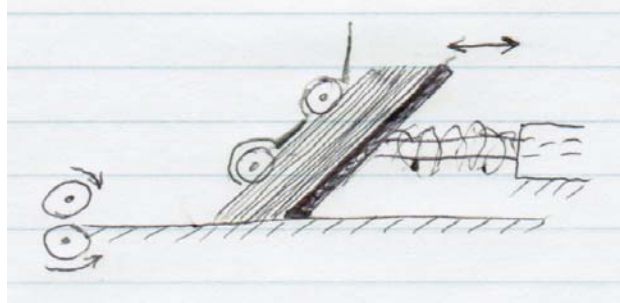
Hand sketch of an initial design idea; the four bar mechanism is shown on the right pushing the cards onto a pair of rollers. The rollers would roll a single card away from the deck and into another pair of rollers that would spit the card out onto the table.
